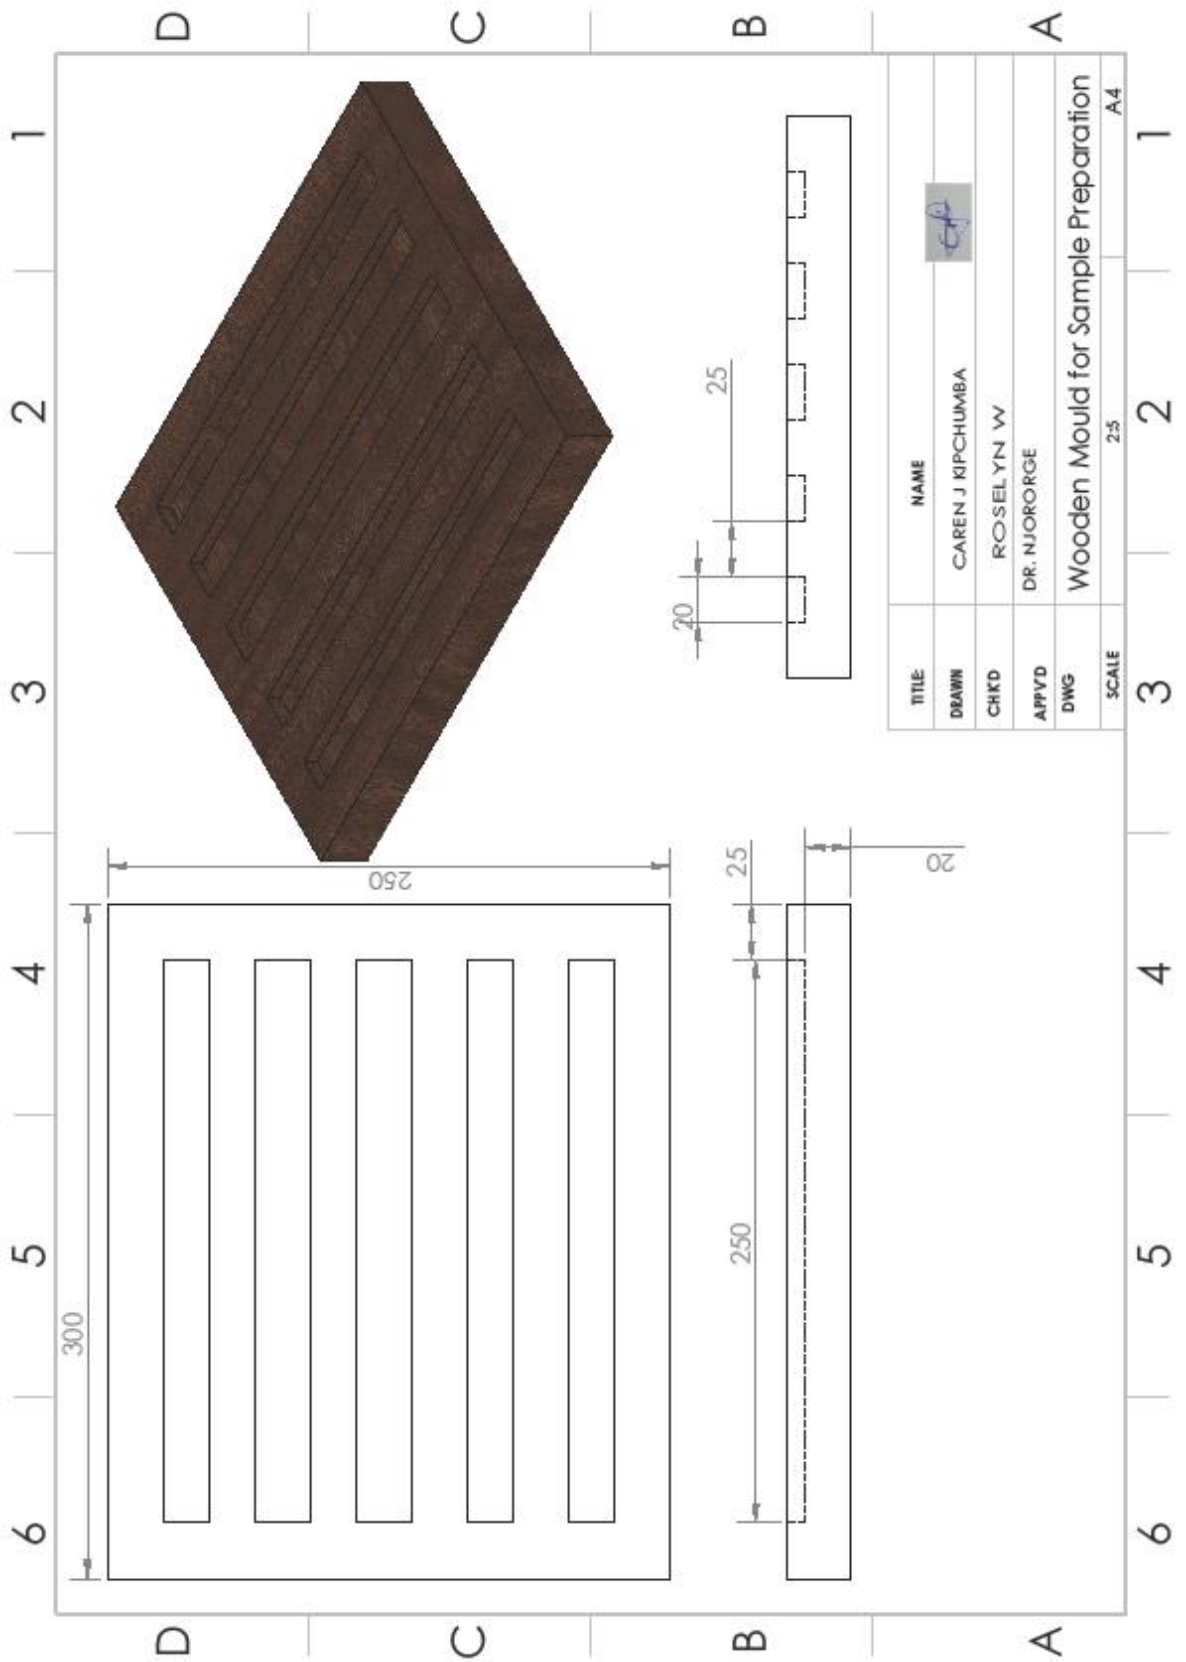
10: Drawings used in the fabrication of the wooden moulds.
